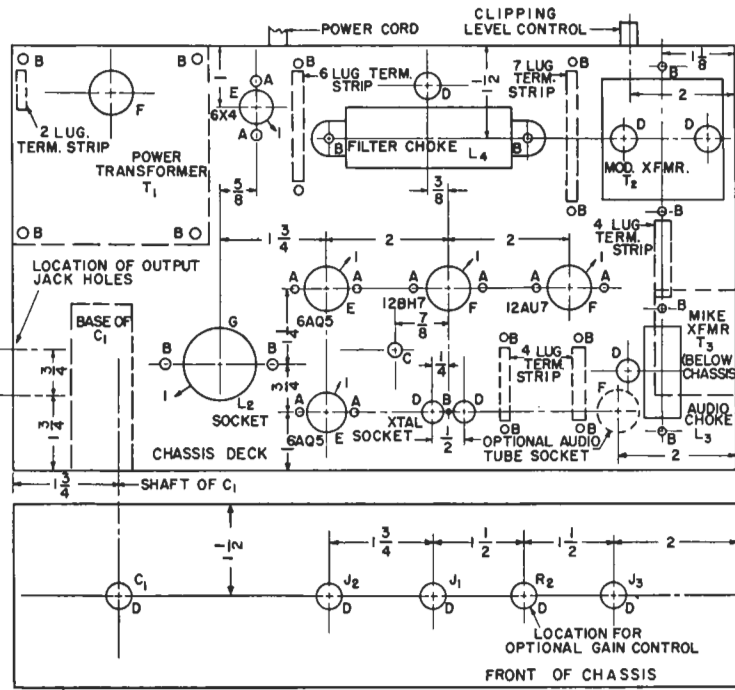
Chassis deck and front panel drilling diagram for the double sideband transmitter. Dimensions are shown from the edges of a 7 x 12 x 3-inch deep chassis. Tube sockets should be mounted with pin 1 in the position indicated at each socket hole. The socket for the optional audio preamplifier tube (V_6) and gain control (R_3) are located as shown.
